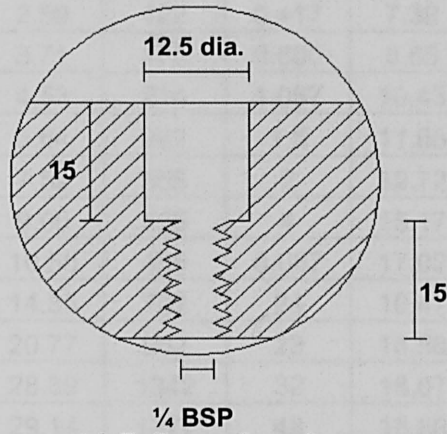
Details for drainage port (all dimensions in mm, not to scale)
